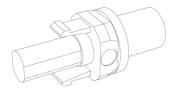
Design, negative (-) chassis connector, type Phoenix 1805177
